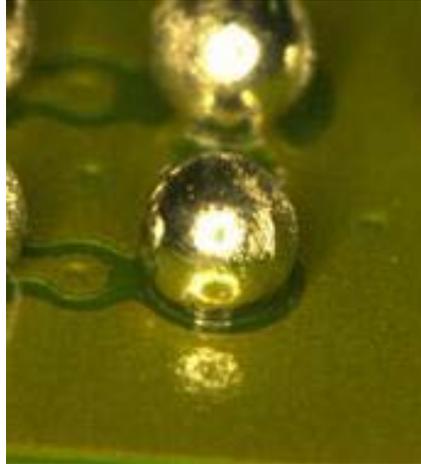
Solder ball on a PCB. From [Palomar Tech.-10].
